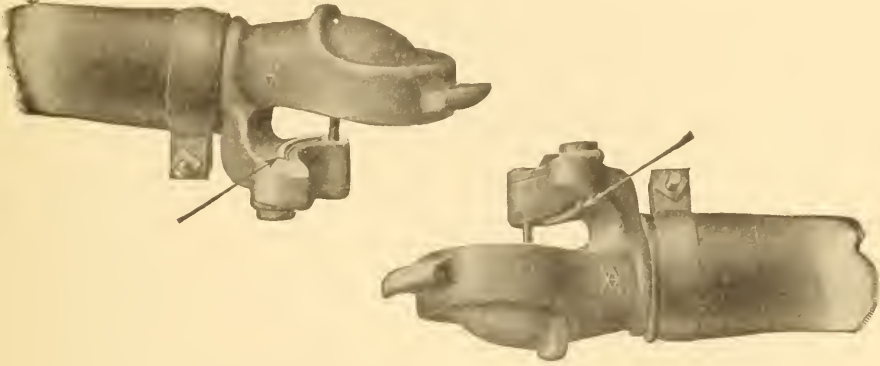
Hose Protecting Coupling, Showing Flexible Head
